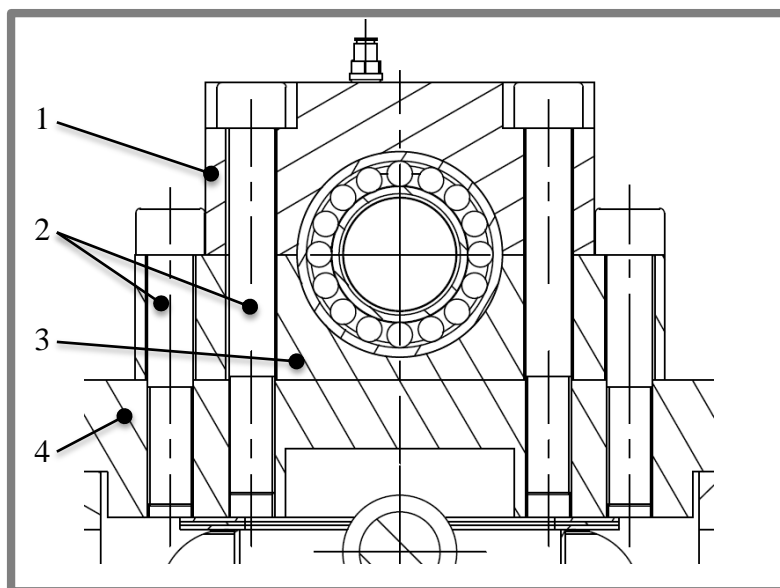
Support bearing assembly, 1: upper part of the housing, 2: fixing screws, 3: bottom part of the housing, 4: upper plate of the main frame
